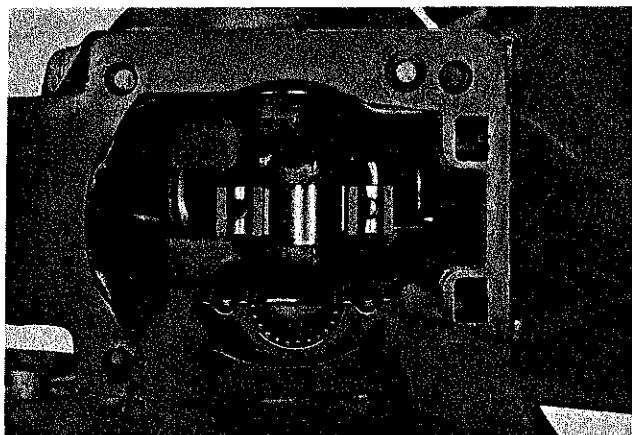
The other 12 needle bearings in the connecting rod cap are held in position by the grease-coated cap bearing surface. The cap is now ready for attaching to the connecting rod in position around the crank journal.
